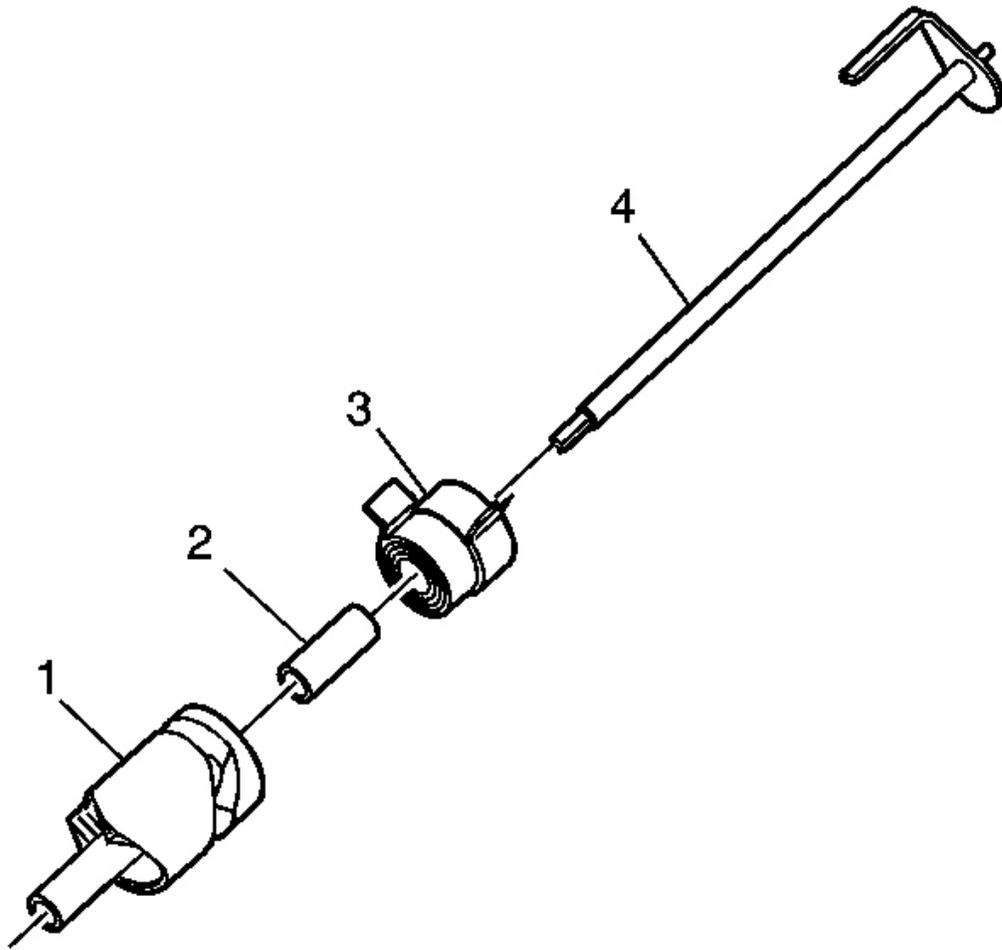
Expanded View Of Shift Detent Lever Assembly
